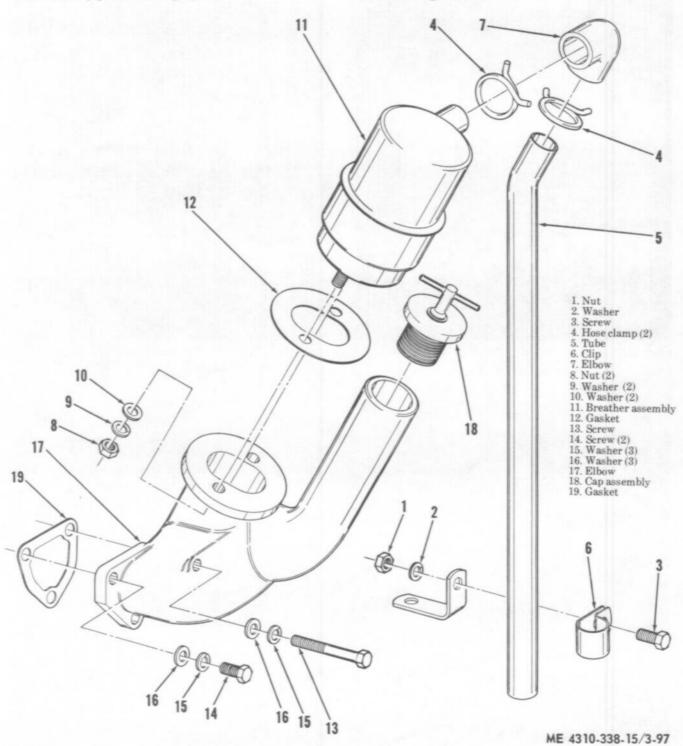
Oil filler and crankcase breather assembly; Disassembly and reassembly.
